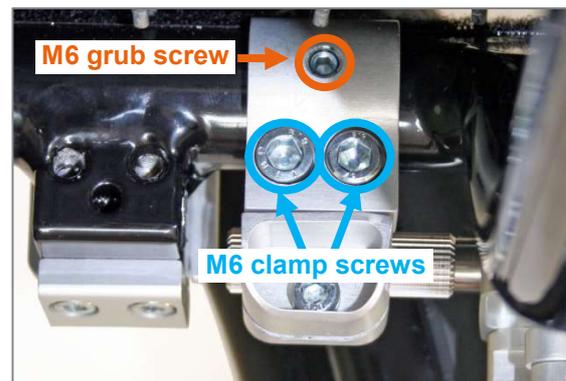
M6 grub screw and M6 clamp screw for moving the clamping bracket on the frame tube (view from the inner side of the product)
